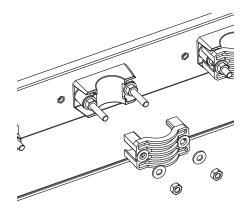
Exploded drawing of the cable locking parts on the bottom of the RLC unit
